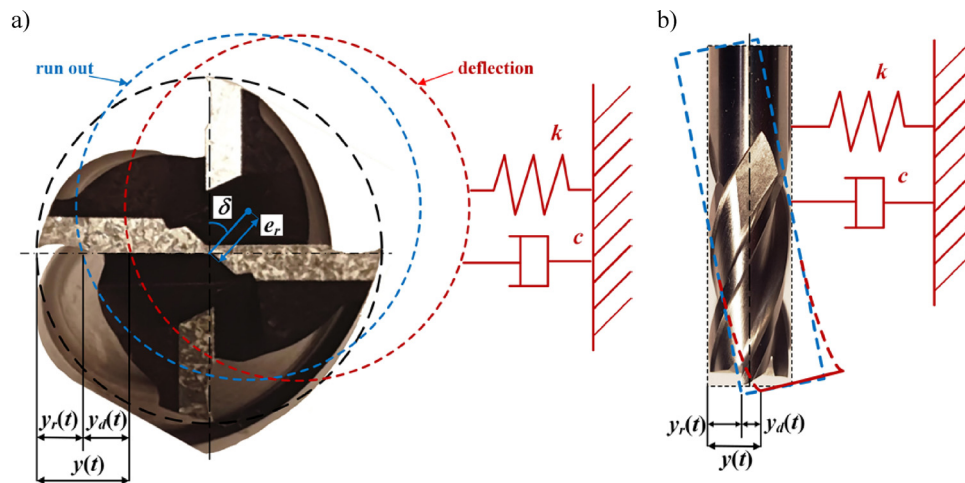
Cylindrical end mill displacements during machining: (a) face of the cutter; (b) reference plane.
